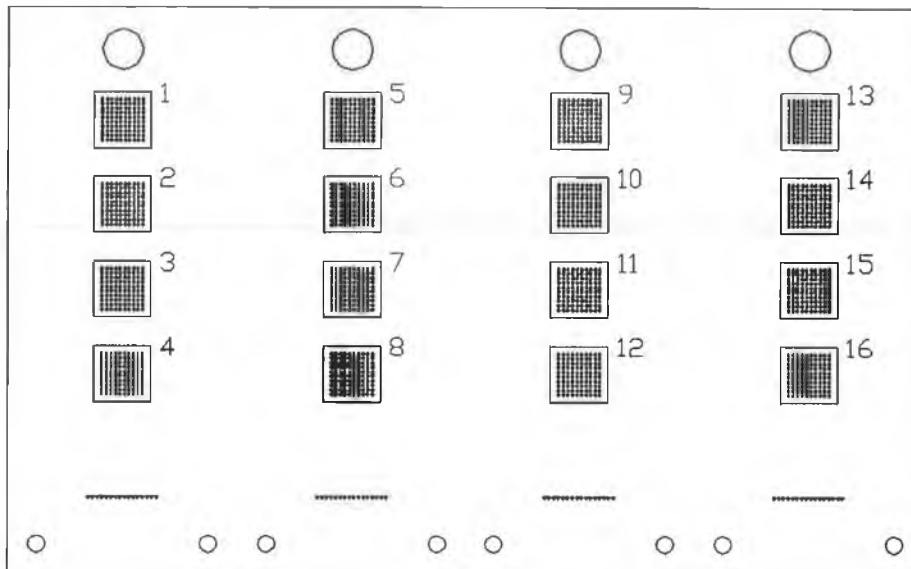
Test vehicle layout showing the sixteen BGA locations
